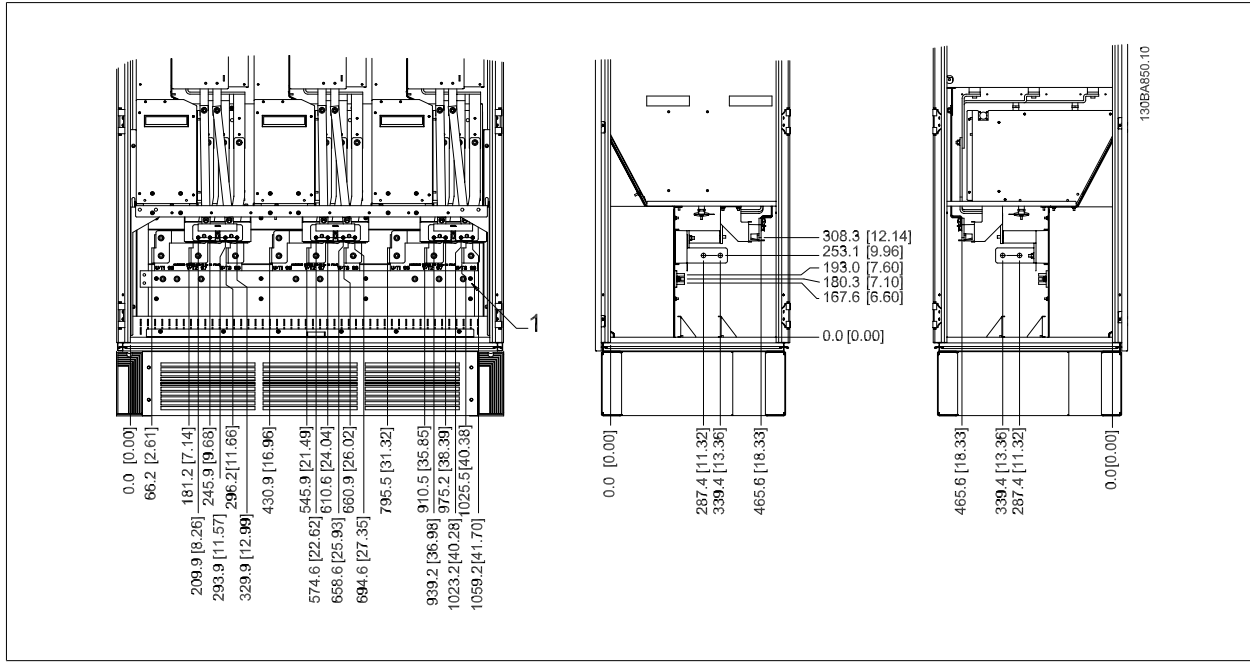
Terminal locations - Inverter Cabinet - 62 and 64 (front, left and right side view)
